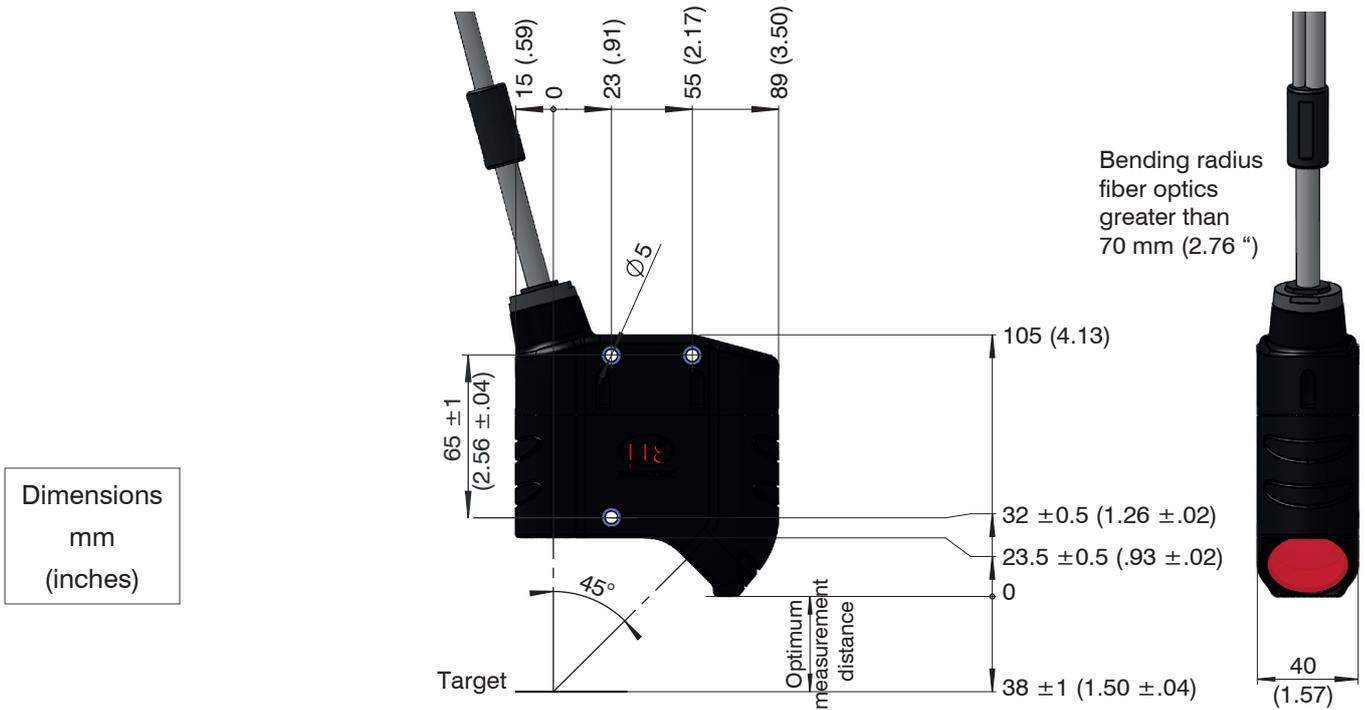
FCS-X-ACS1-45/0-38-XXXX fiber optical angle sensor dimensional drawing
